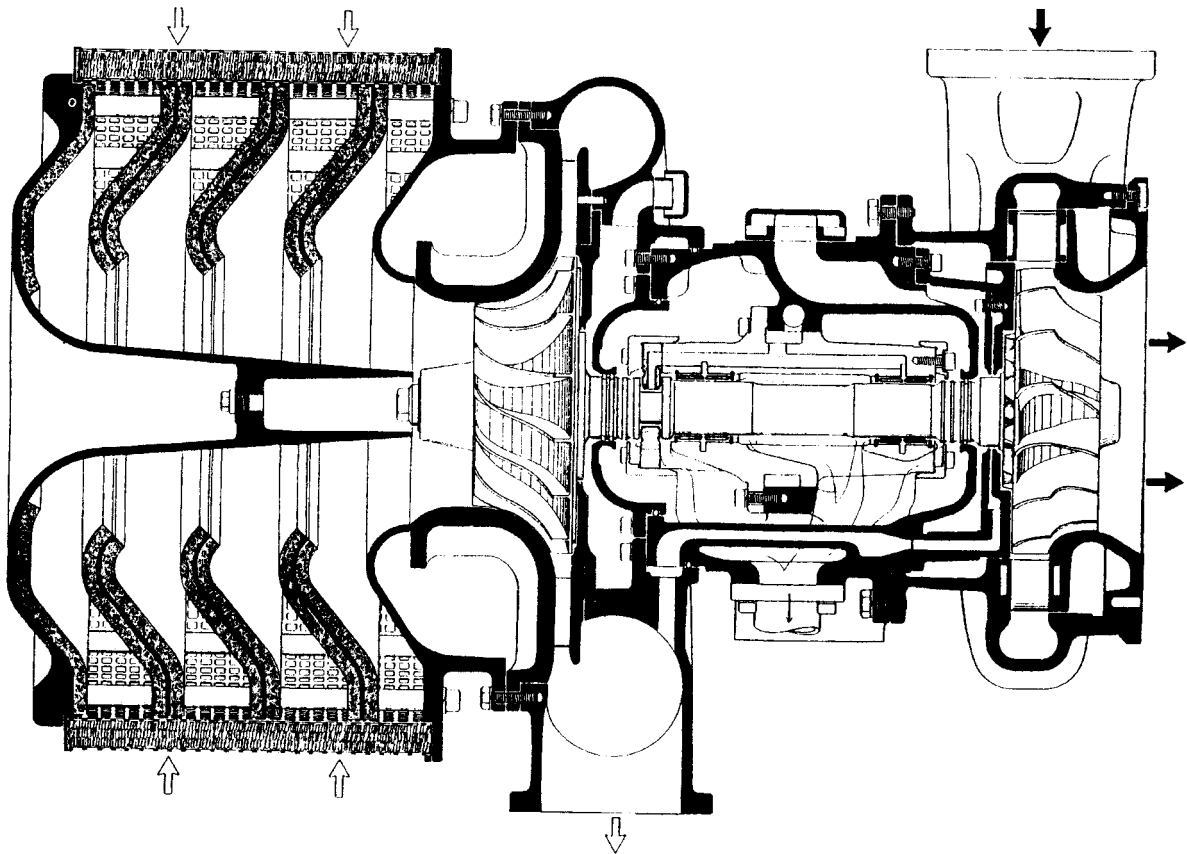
An industrial engine turbocharger with radial compressor and turbine (Brown Boveri RR series)
